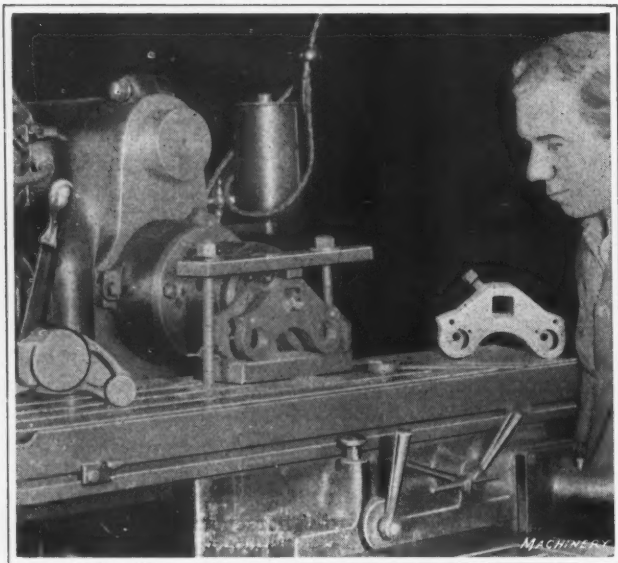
Application of the "Radbore" Square-hole Drill on a Milling Machine
